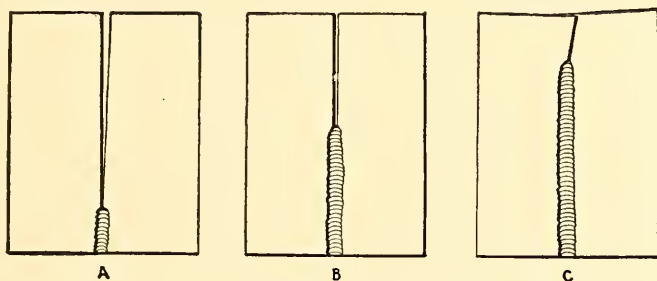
Plates Welded Without Proper Divergence.
